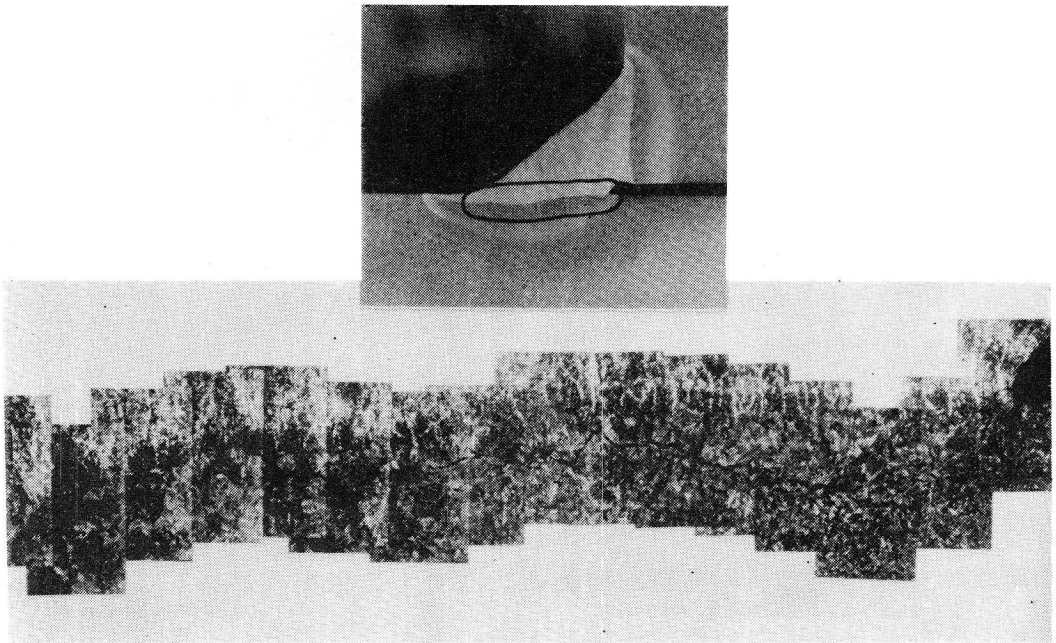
Macro and micro structures adjacent to the weld crack of Non-restraint T type fillet test
